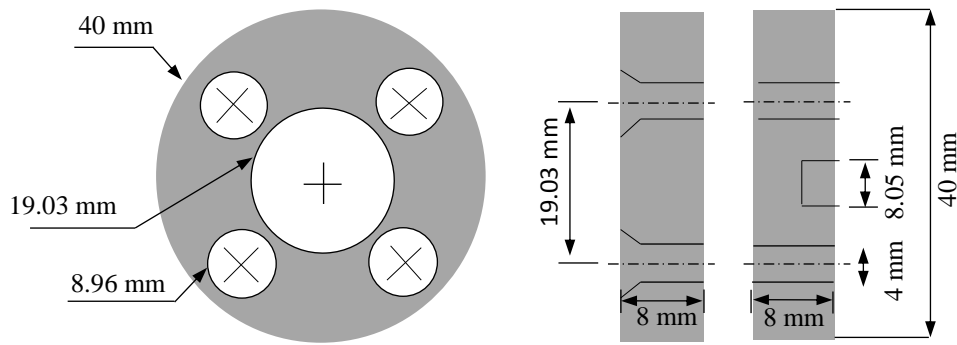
23- Twin-Disc Machine End Post Specimen Holder.
